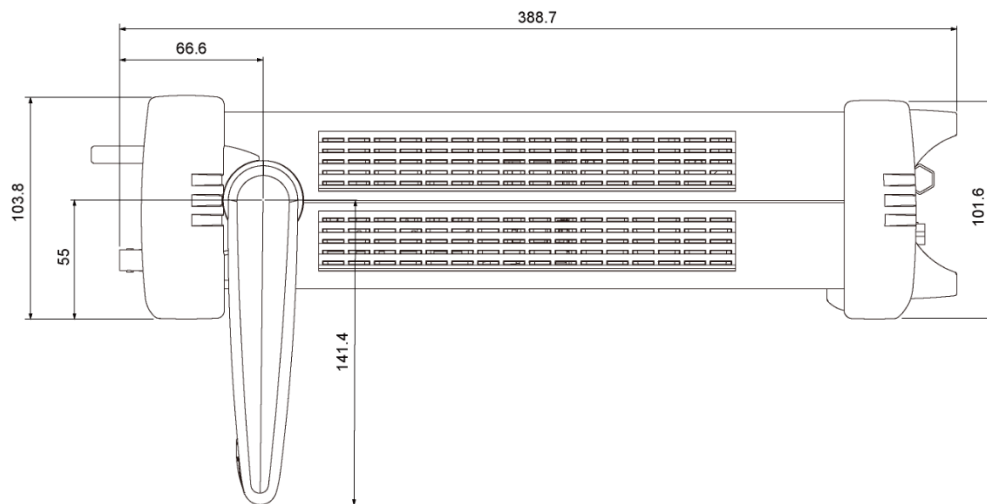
Dimensions (side view, with handle and bumper, in millimeters, nominal)
